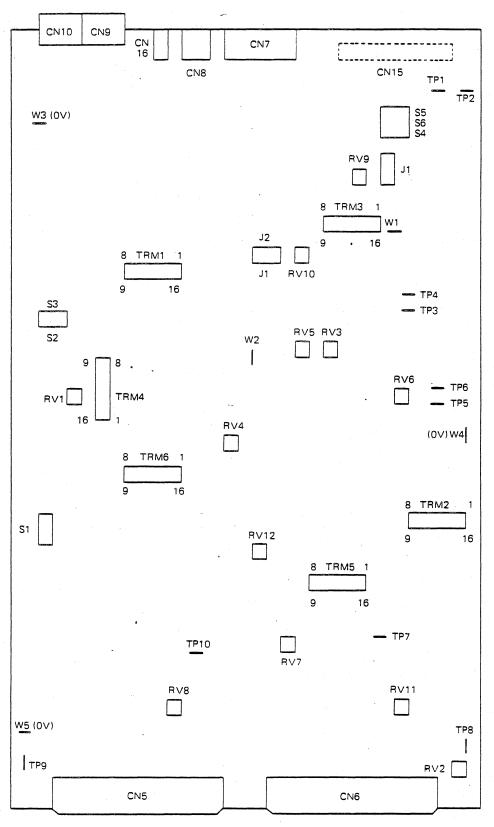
CZOM PCB Assembly Test Points Arrangement
